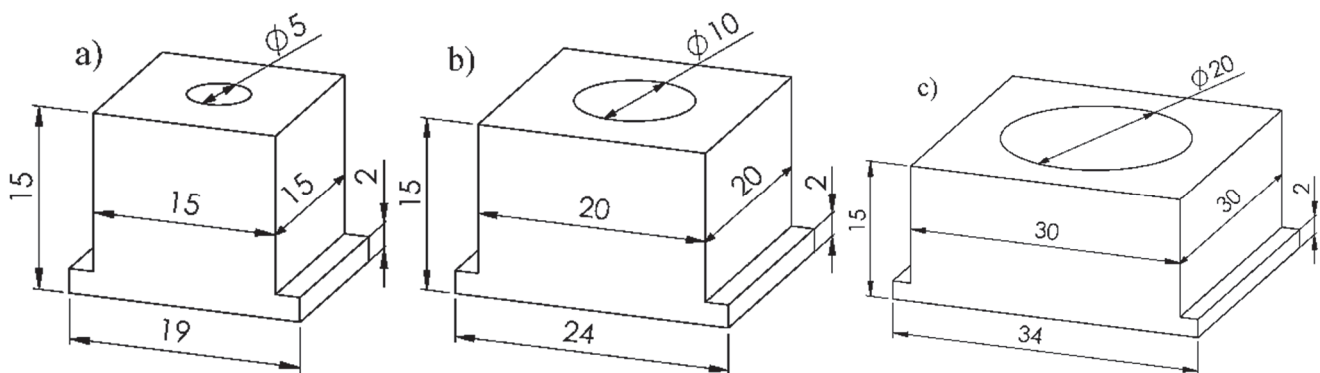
Design of test specimens with a cylindrical hole in nominal dimensions: a) 5 mm; b) 10 mm and c) 20 mm
